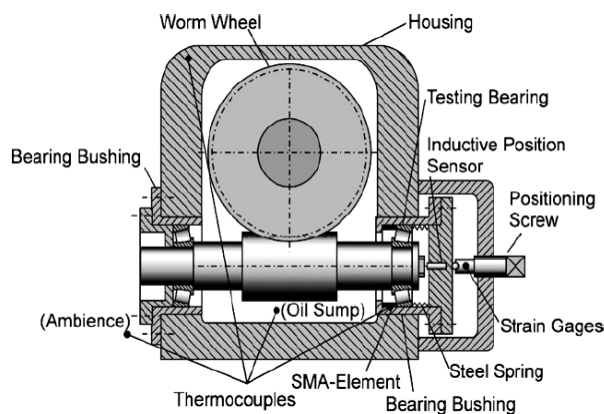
Worm gear with bearing bushings for clearance adjustment [24]
